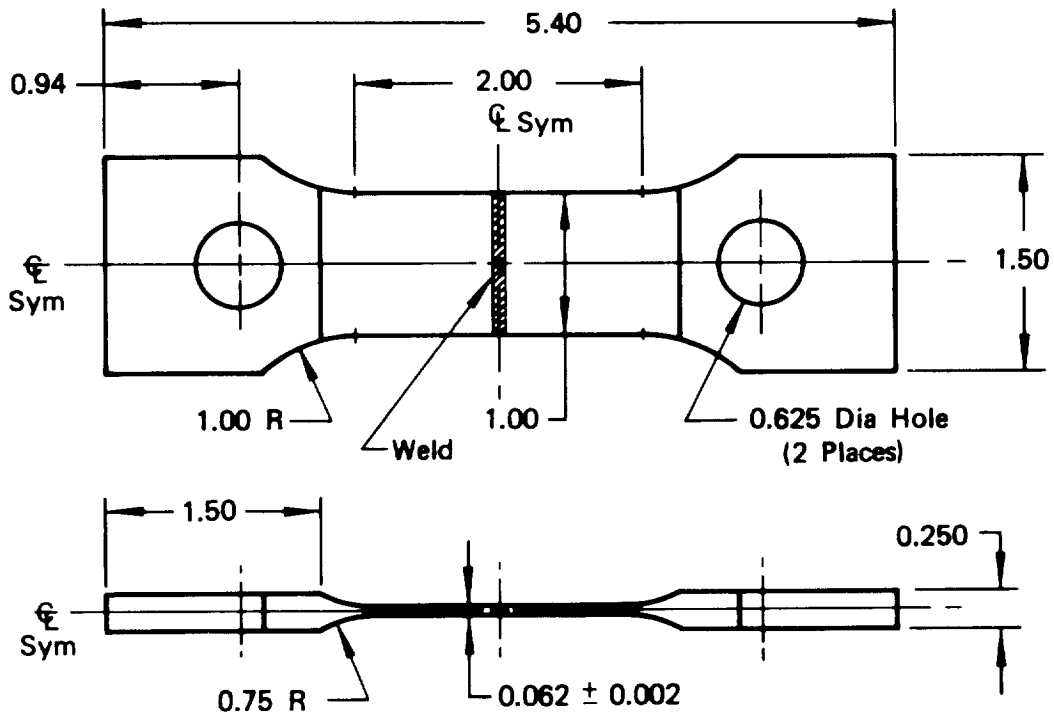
WELDMENT TENSILE SPECIMEN (PART II)
